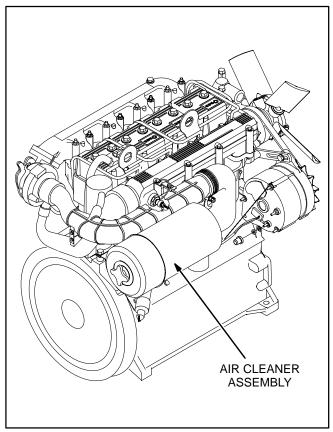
HEAVY DUTY AIR CLEANER
